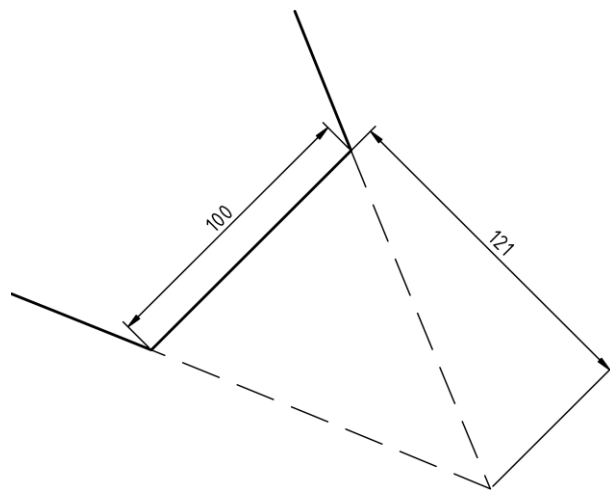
Detail of Sail Corner (dimensions are in millimeters)
